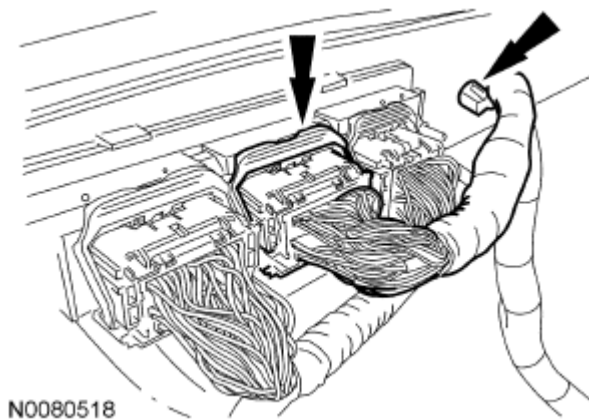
Locating PCM Electrical Connector And Wire Harness Retainer
